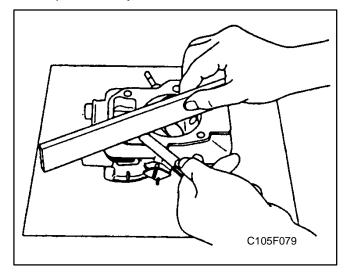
CYLINDER HEAD SURFACE FLATNESS
